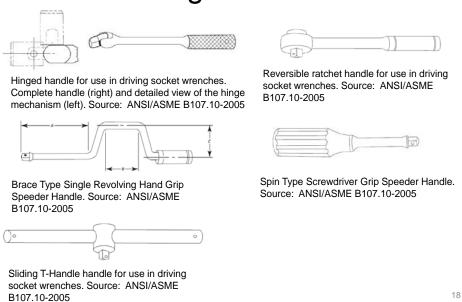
Illustrations of Machines/Tools returned by Query 7.
